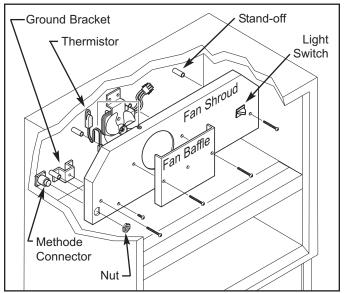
700BC/I-3 Fan Baffle & Shroud
